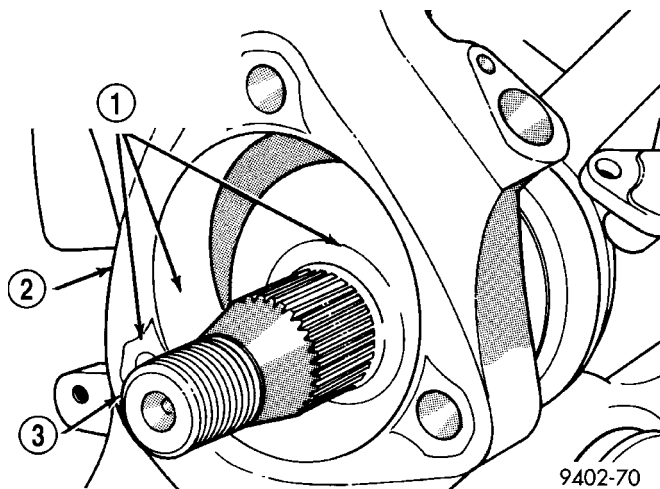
Hub And Bearing Assembly Mounting Surfaces
